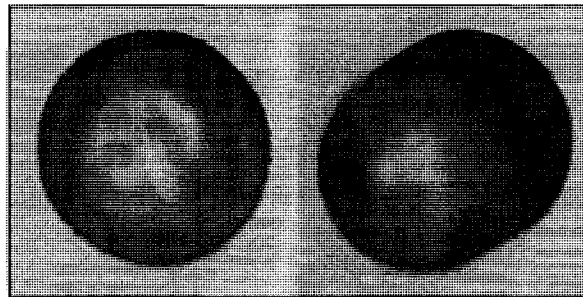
Well-defined circular contour (left) and full figured deformed micro-hole due to tool bending (right) [17].
